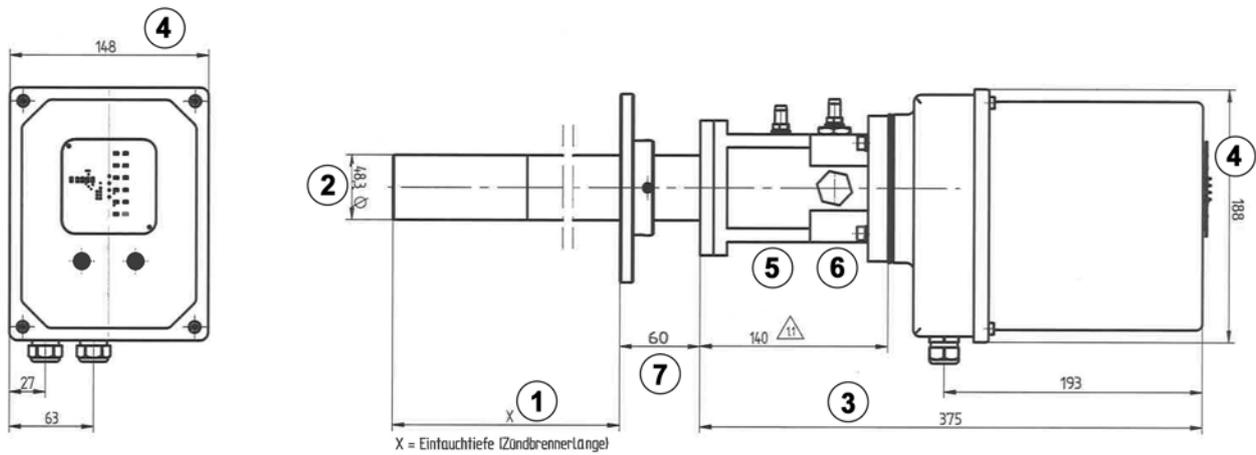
Dimensions of GFI48 pilot burner design A/B
